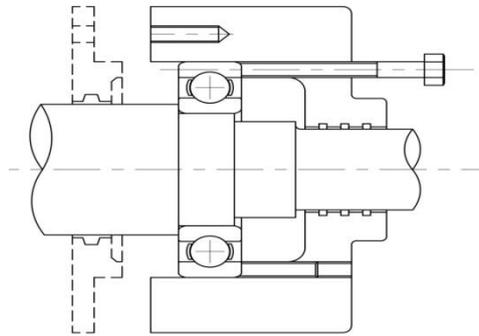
Removal of Outer Ring with Dismounting Bolts
